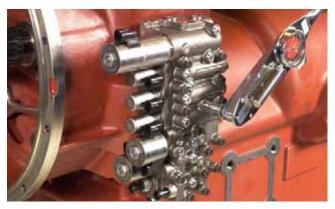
Install control valve and tighten capscrews to specified torque (refer to "TORQUE SPECIFICATIONS" on page 175), following the sequence outlined in the "Transmission Assembly Instructions" on page 97 of the manual.
